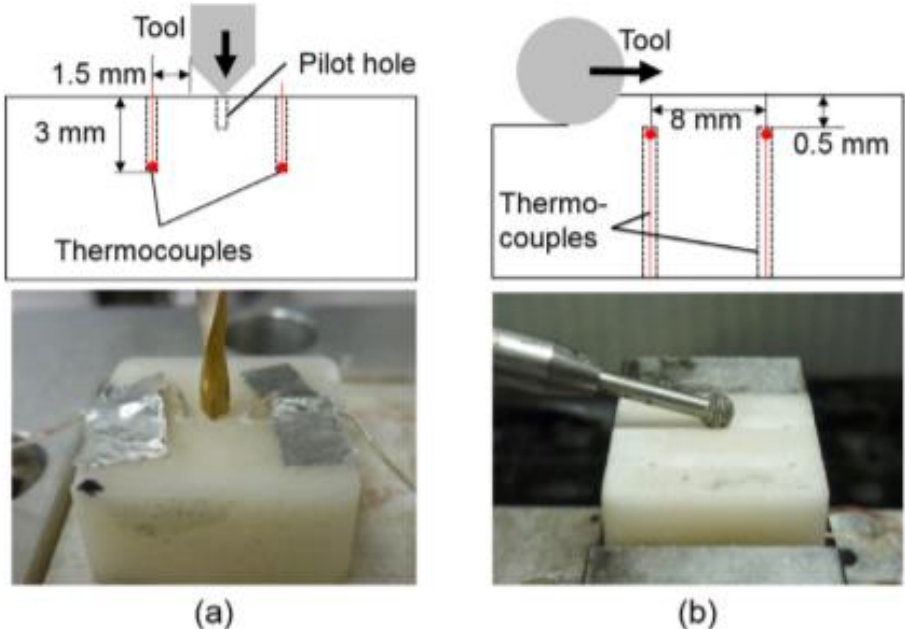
Experimental setups for machining temperature tests: (a) drilling set up for the twist drill and K-wire, and (b) grinding setup for the abrasive bur [50]
